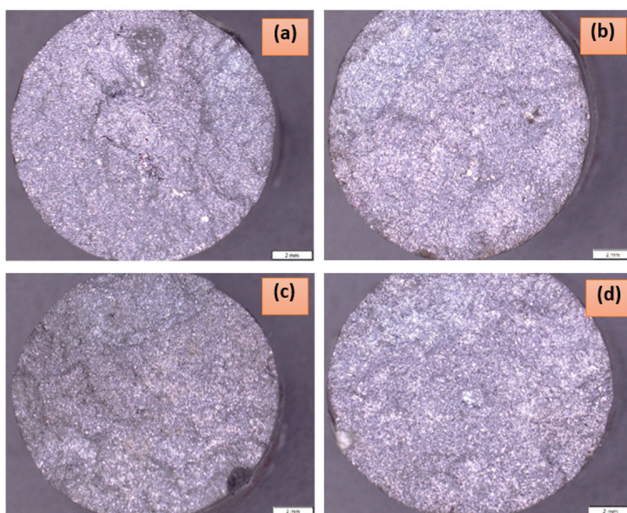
Surface fracture of tensile testing for Al/slag composite (a) 0%, (b) 1%, (c) 2%, and (d) 3%.
